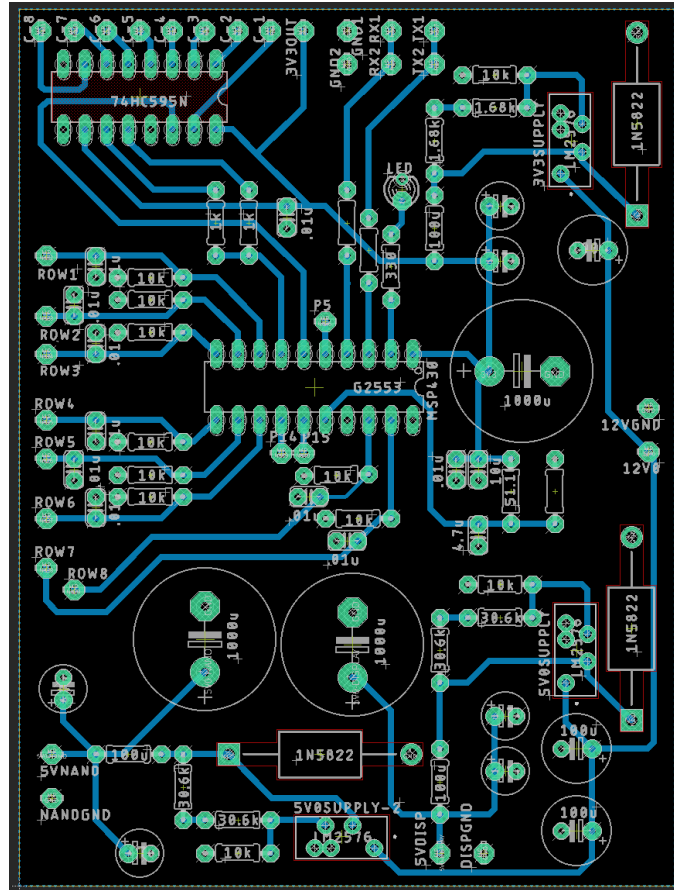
(PCB - Design): The eagle brd view of our PCB design.
